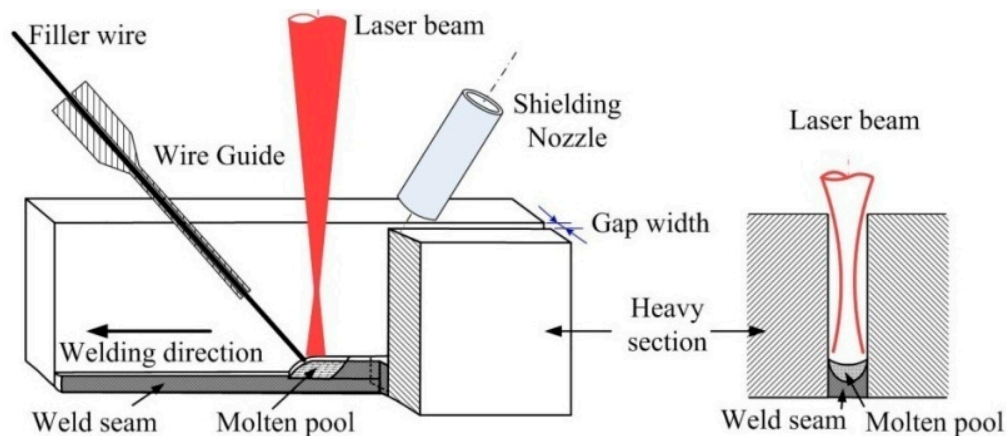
Experimental layout of the ultra-narrow-gap laser conduction welding with filler wire.
